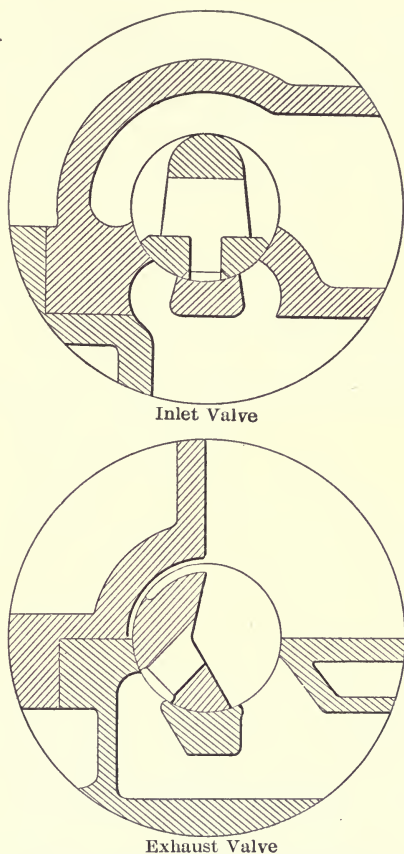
Sections through Corliss inlet and exhaust valves.
